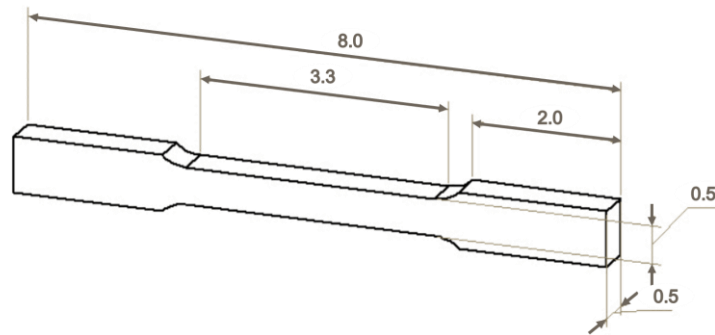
Tensile specimen geometry with dimensions in inches.
